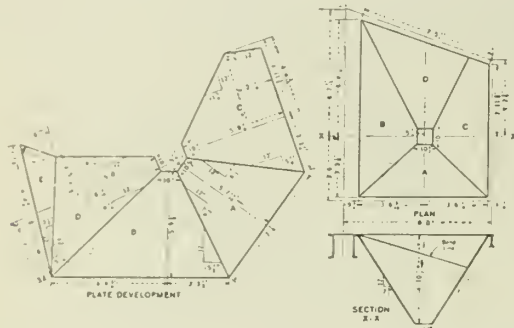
Drawing for Riveted Skew Hopper Welded.
